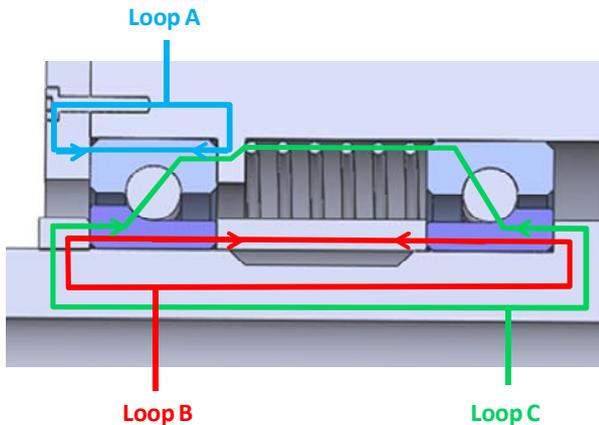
Preload and bearing clamping loops in back-to-back soft preload configuration.
